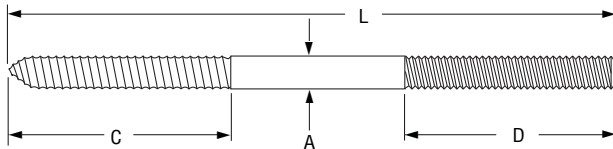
Standard Thread Lengths(in) • Loads (lbs)
